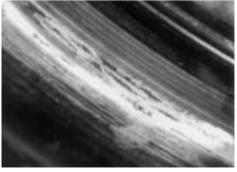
Corrosion on Outer Ring Raceway of Deep Groove Ball Bearing
